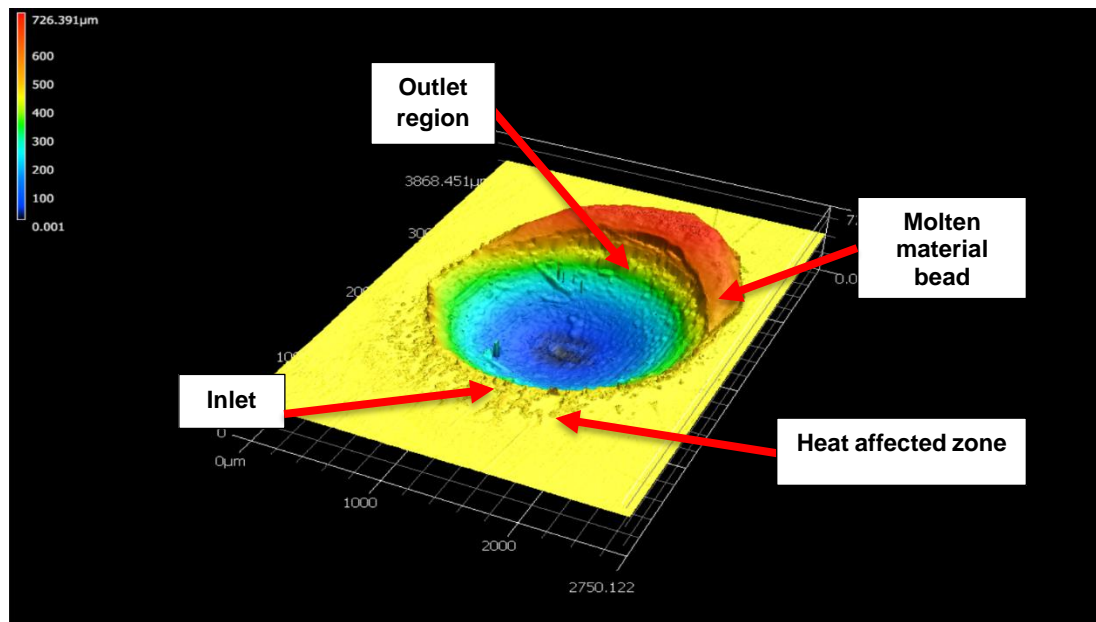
Image depicting the material removal in an indent A for a naked contact of the rotating polishing tool on the workpiece at 25000 RPM.
